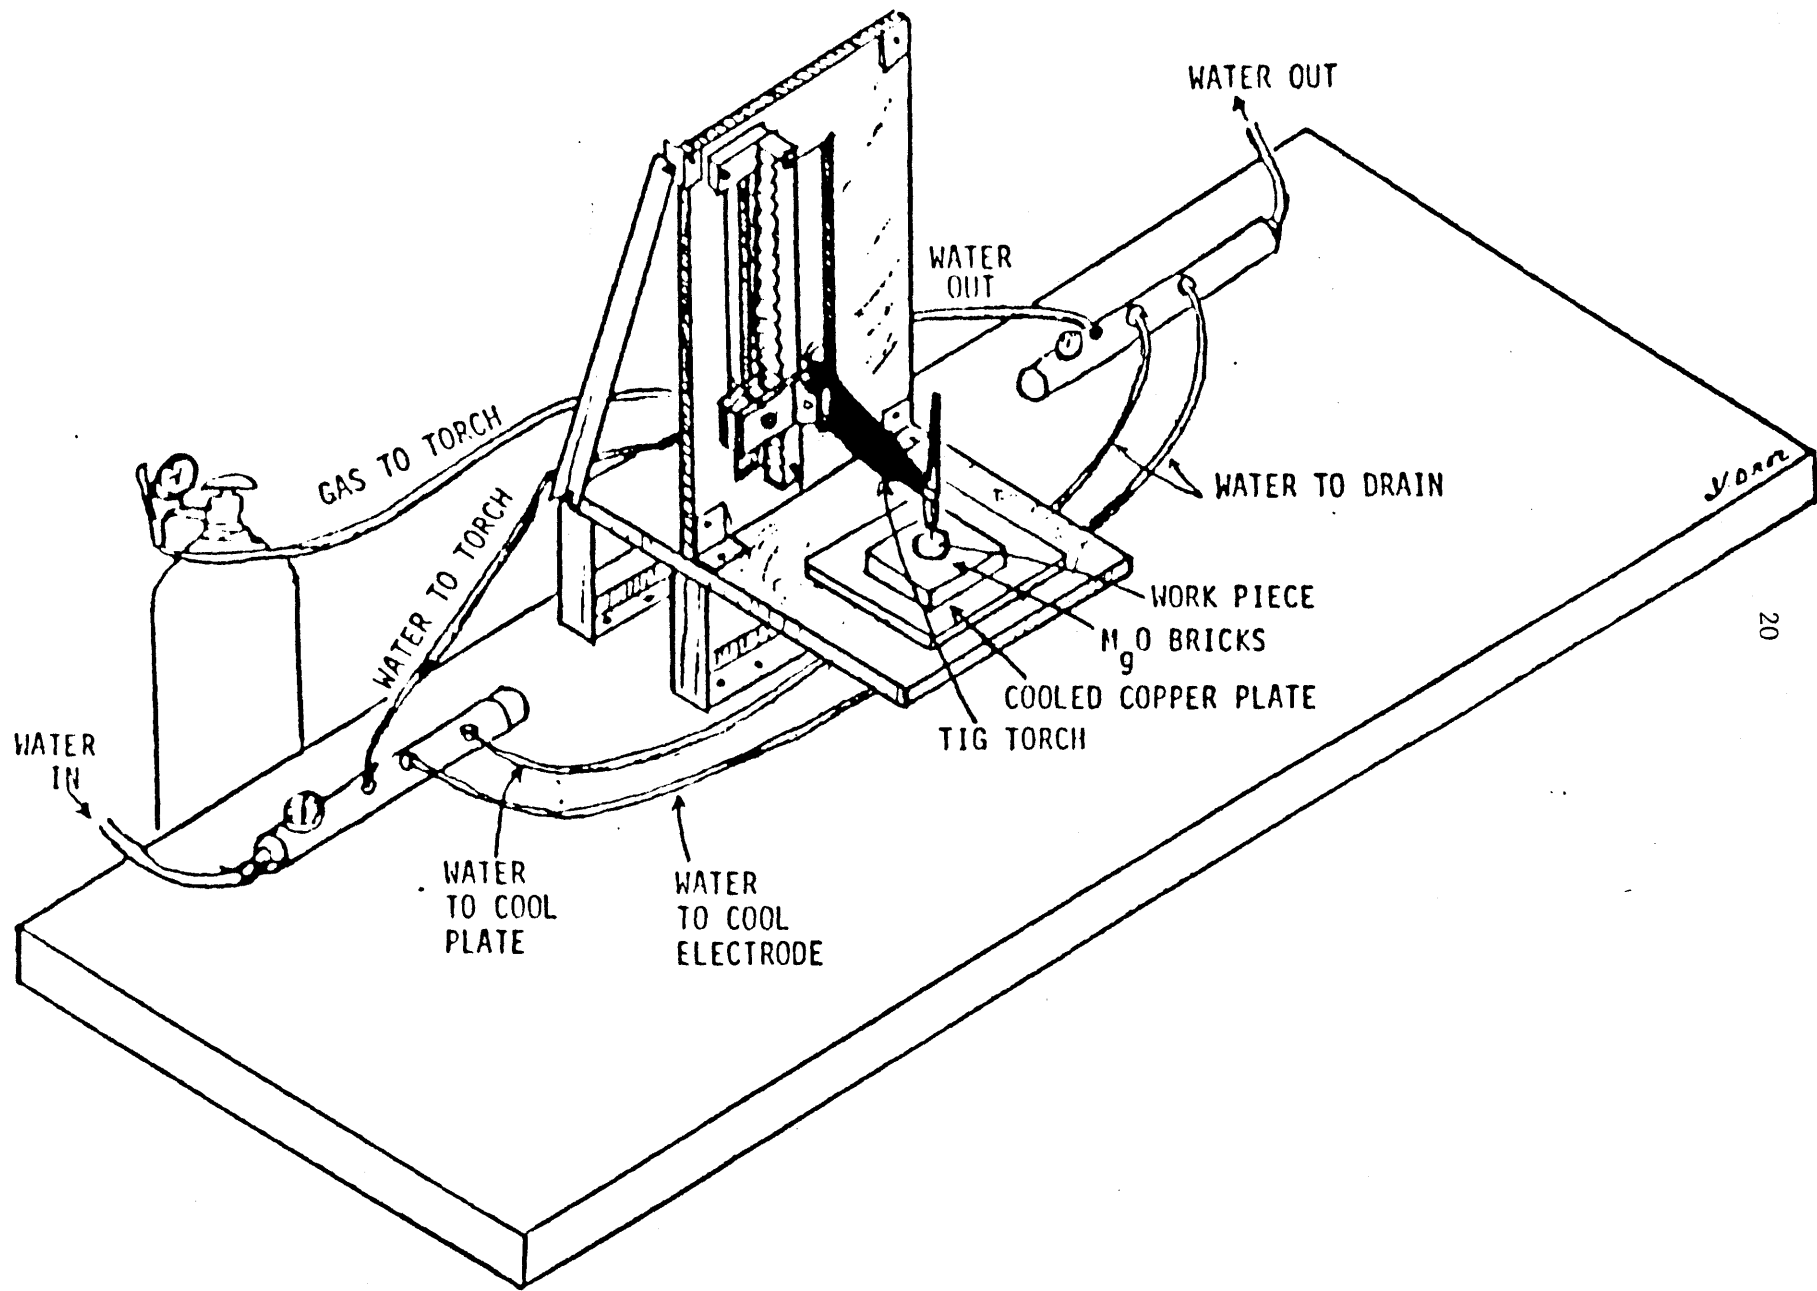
OVERALL VIEW OF ARC WELDING EXPERIMENTAL SET-UP
